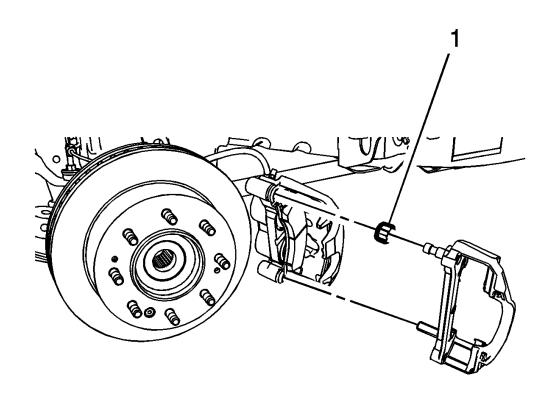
Upper Brake Caliper Pin Bushing Courtesy of GENERAL MOTORS COMPANY
